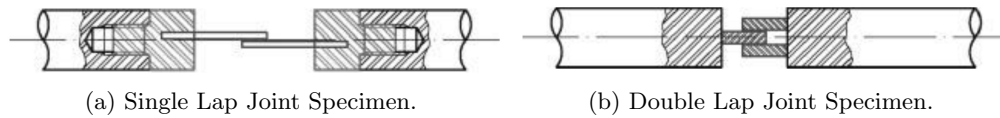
Most used Joint Specimen for SHPB Machines [18].
